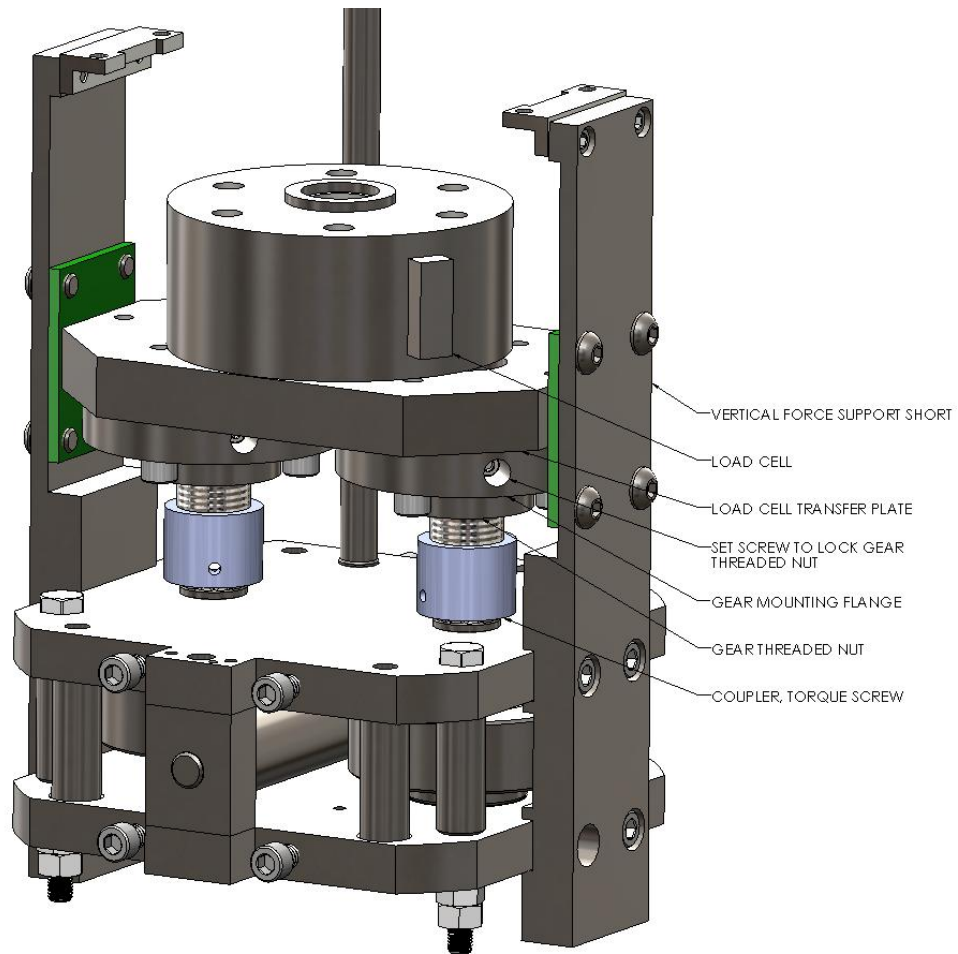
Illustration of the Load Cell assembly and its components.
